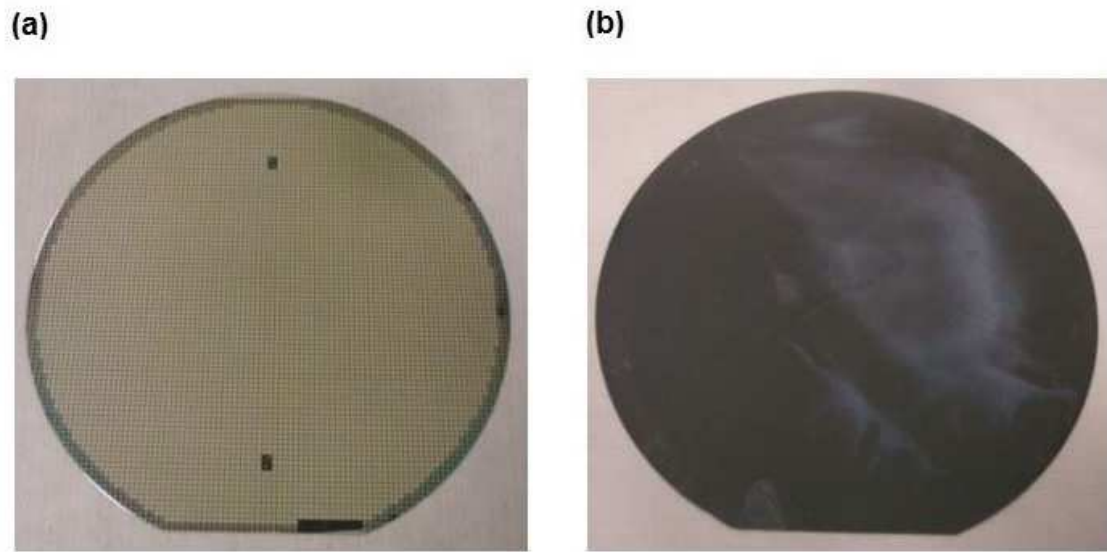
(a) Wafer front side with multiple devices; (b) wafer backside view with a chemical polishing staining.
